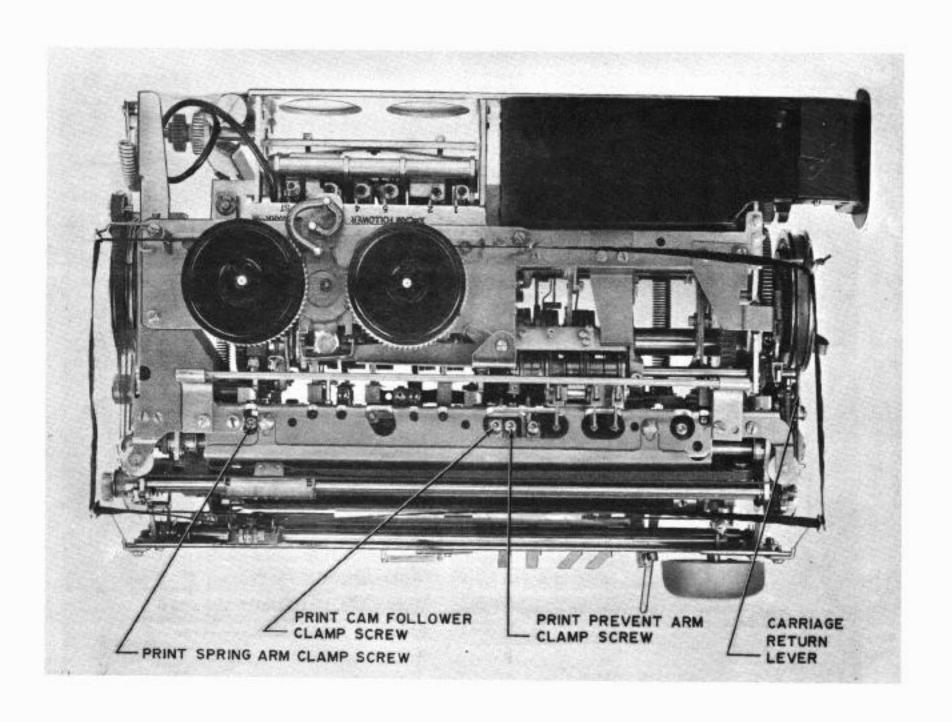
Print Disconnect and Print Shaft Adjustment
